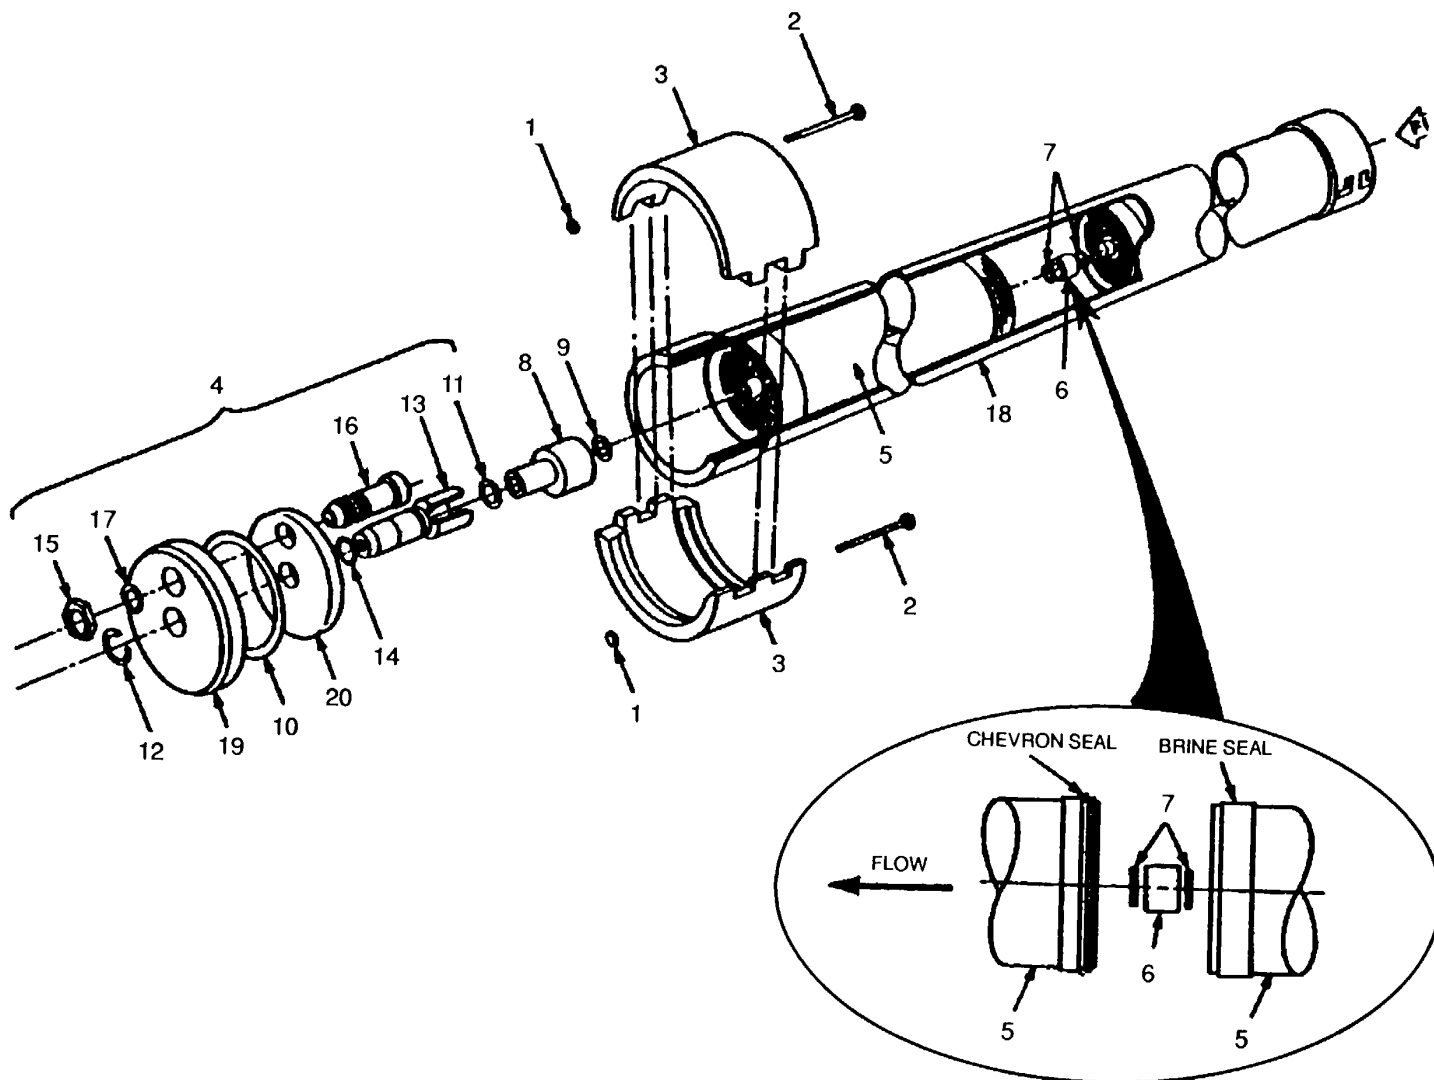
RO Block Pressure Tube Assembly (sheet 1 of 2)
